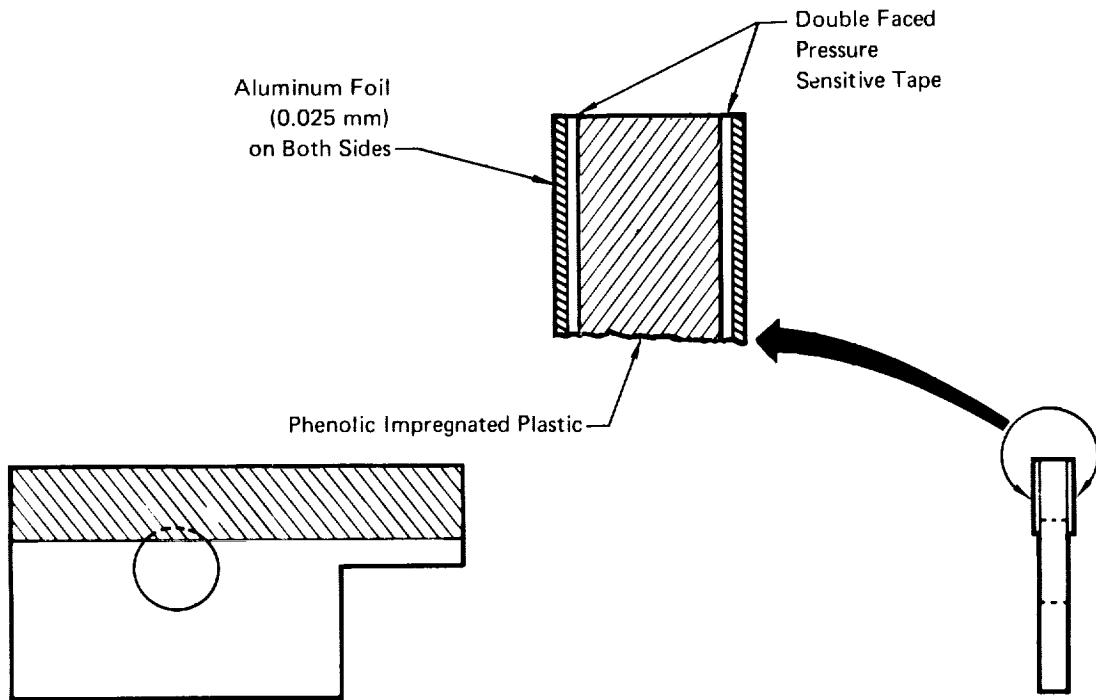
"PARTIAL-FOIL" SWITCH ASSEMBLY
